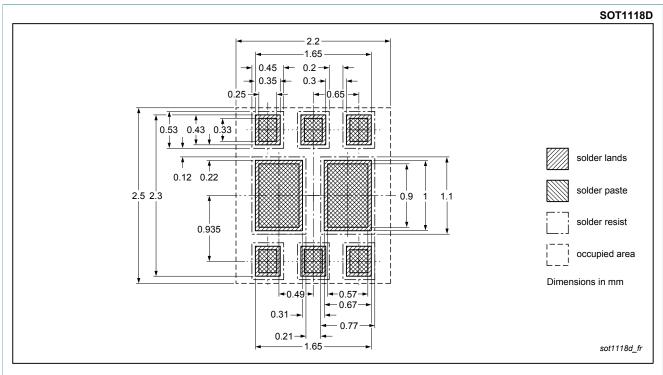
Reflow soldering footprint for DFN2020D-6 (SOT1118D)
